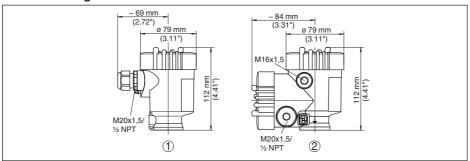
Housing versions in protection IP 66/IP 67 - with integrated display and adjustment module the housing is 9 mm/0.35 in higher
